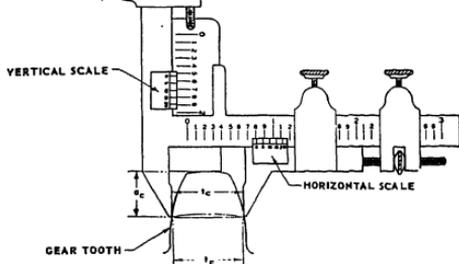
Measuring gear teeth with a vernier caliper.
